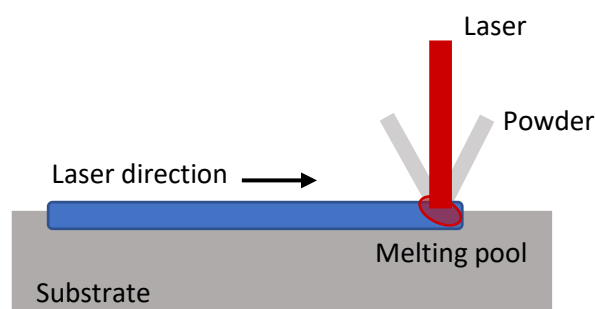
Laser Metal Deposition process adapted from Cheikh⁵².
